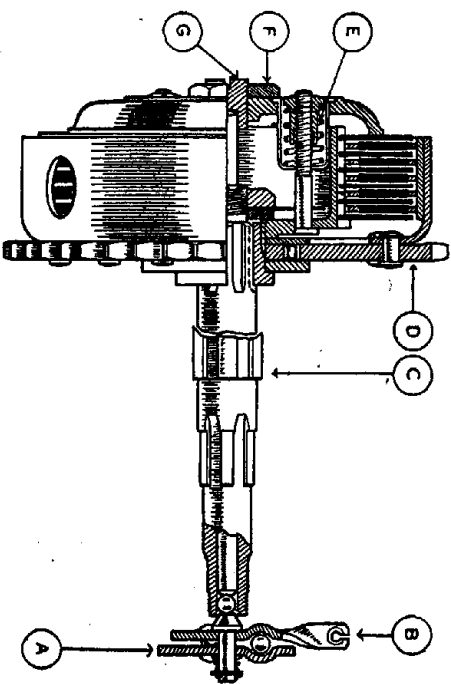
SECTION THROUGH CLUTCH FITTED TO B.52 GEARBOX.
